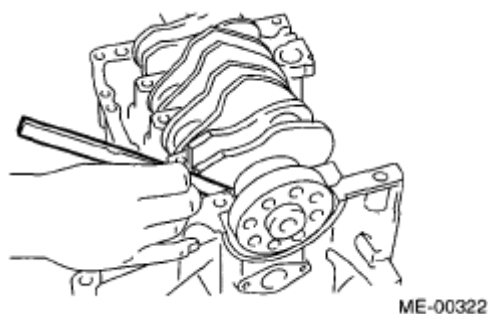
Measuring Thrust Clearance Of Crankshaft At #5 Crank Journal Bearing
